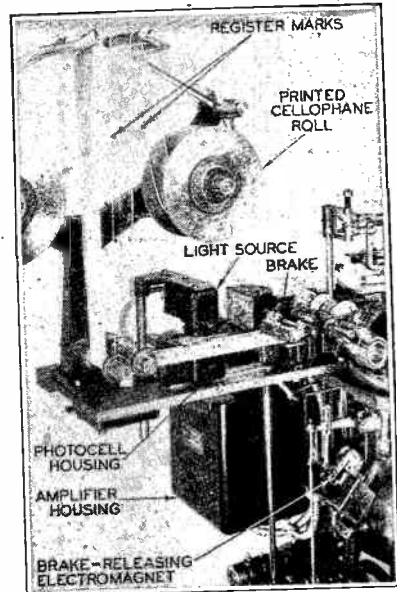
B (right). View of modern packing machine; cellophane rolls containing printed designs are accurately cut to required size sheets by means of photoelectric registry control, insuring that the pattern is perfectly centered on each sheet.
